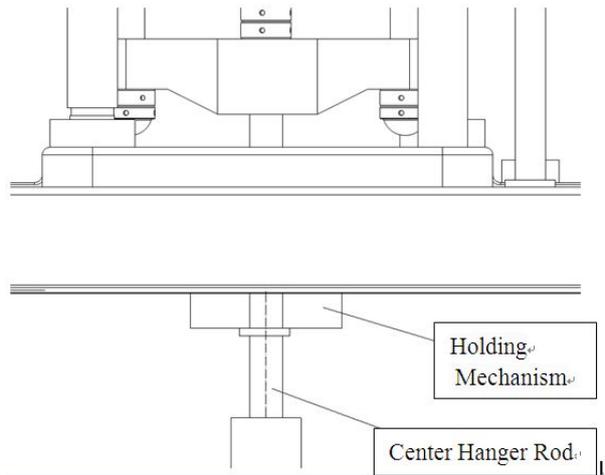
Original structure schematic drawing of hydraulic holding mechanism
